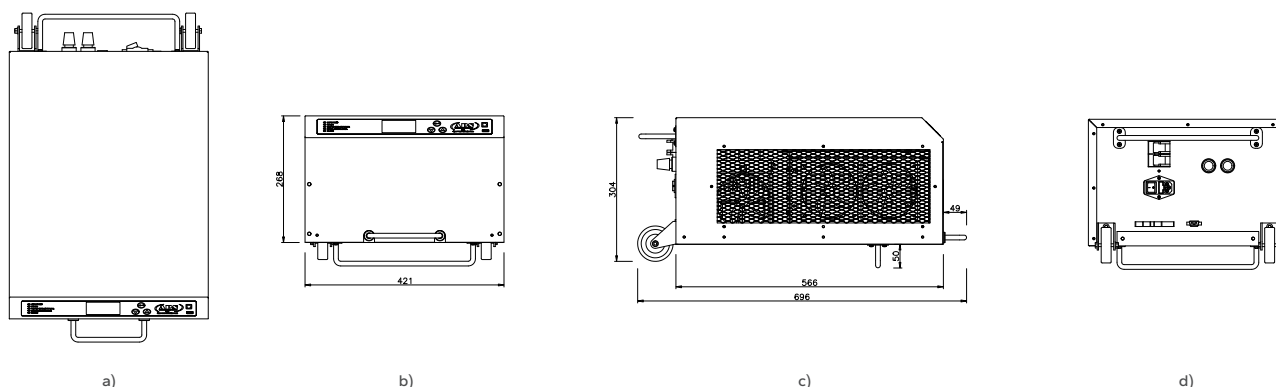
Views with the dimensions of the BRI type discharge mobile compact:
